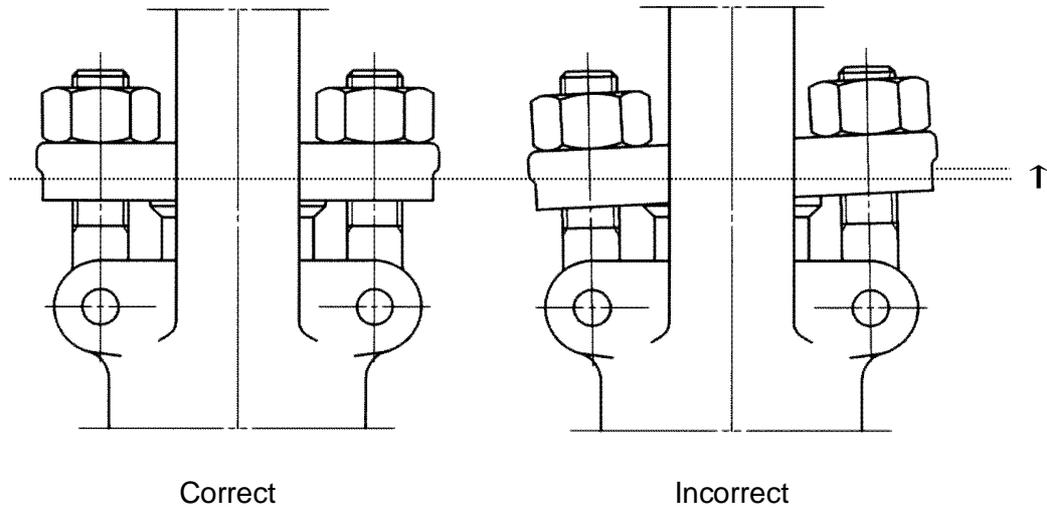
Examples for Adjustment (Tightening) of Gland Bolt Nuts
